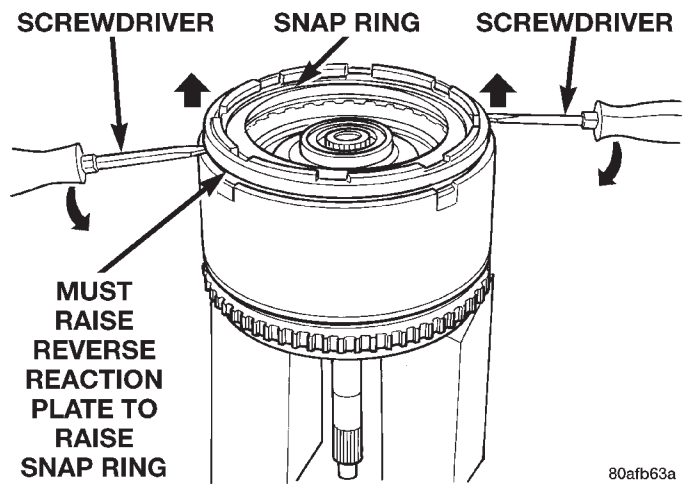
Seating Snap Ring to Determine Reverse Clutch Clearance
